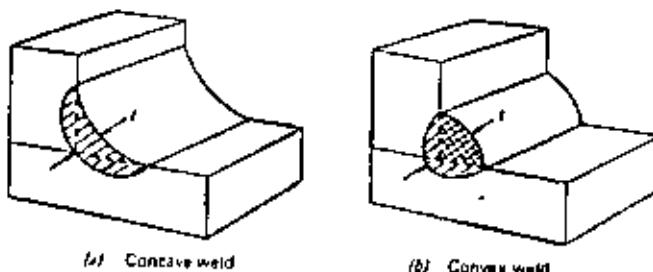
The leg size and the surface of a concave fillet weld (a) may be larger than that of a convex bead (b), but its throat, t , may be considerably smaller.
